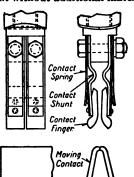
Details of the Type F-11 Contacts Used on the 400-Ampere, 2500-Volt Breaker
